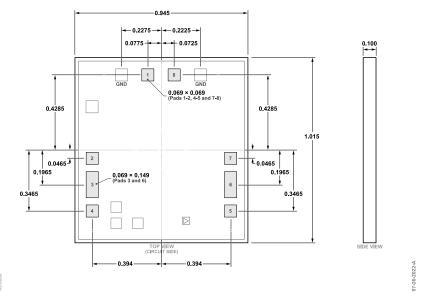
8-Pad Bare Die [CHIP] (C-8-28) Dimensions shown in millimeters
